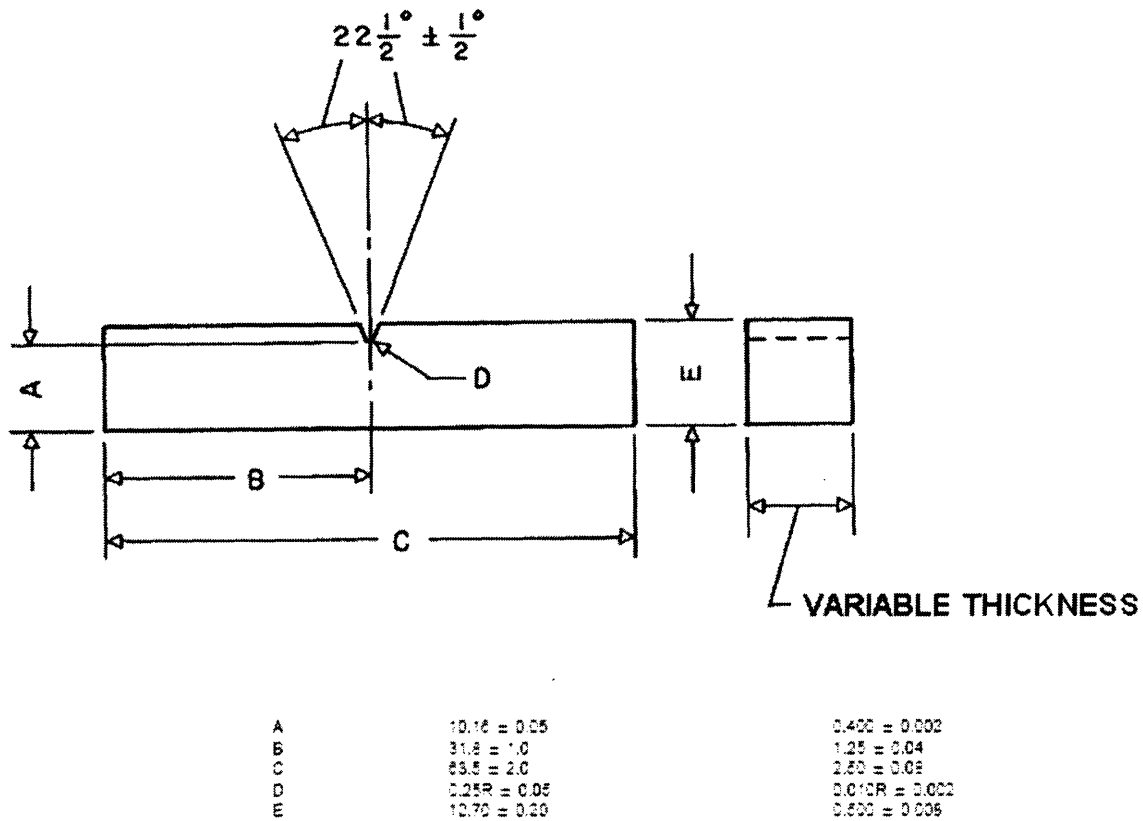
Standard Izod specimen dimensions. All dimensions are given in mm. [Standard Test Methods for Determining the Izod Pendulum Impact Resistance of Plastics].
